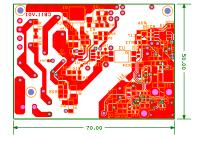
EVLSTCH03-45WPD PCB bottom layer layout
